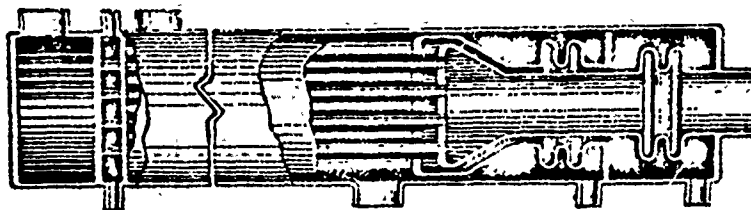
Heat exchanger with the connection of the pipe panels to the housing through flexible elements.
